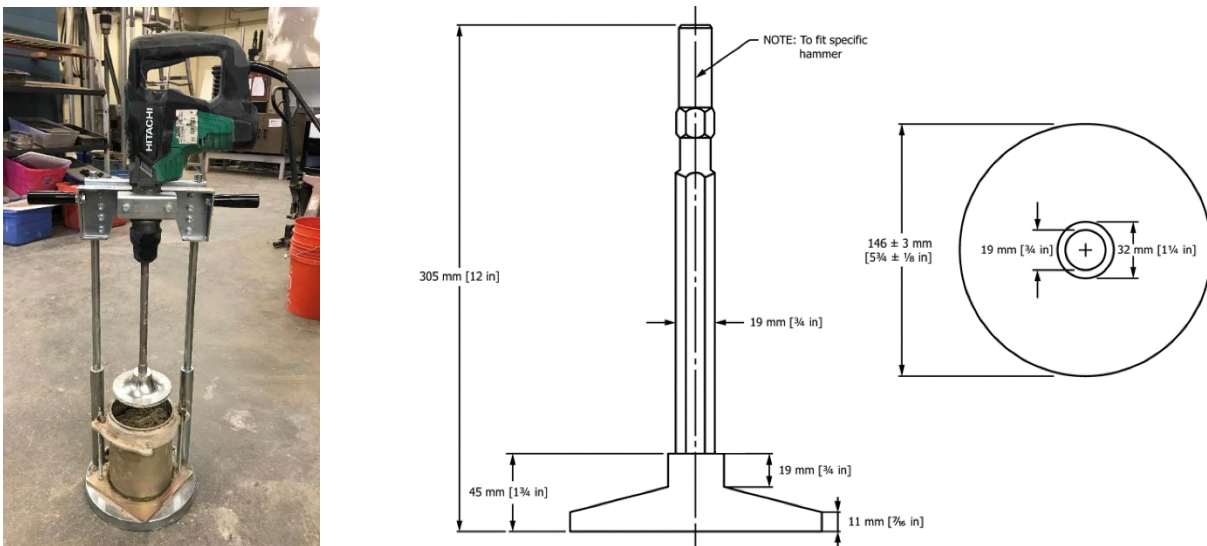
Impact Hammer Setup and Circular Steel Tamping Plate and Metal Shaft.
